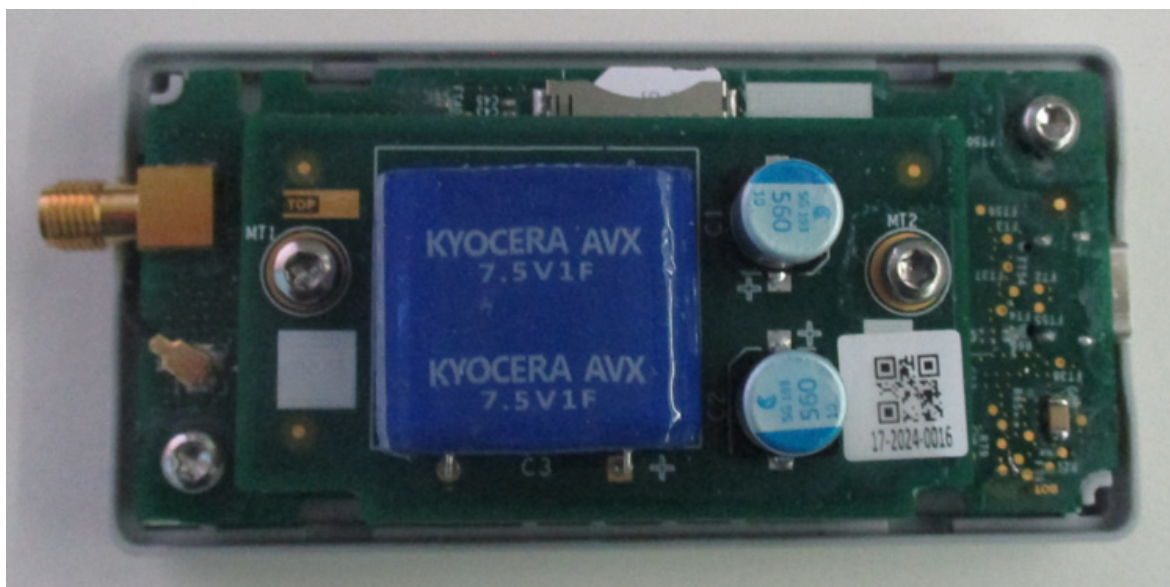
Internal View with Bottom Cover RemovedFigure 6: Top View of Super Capacitor PWB
